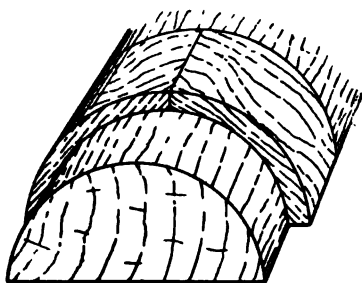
Limited Extension of Cylindrical Pattern, by fitting swept pieces round the print.
